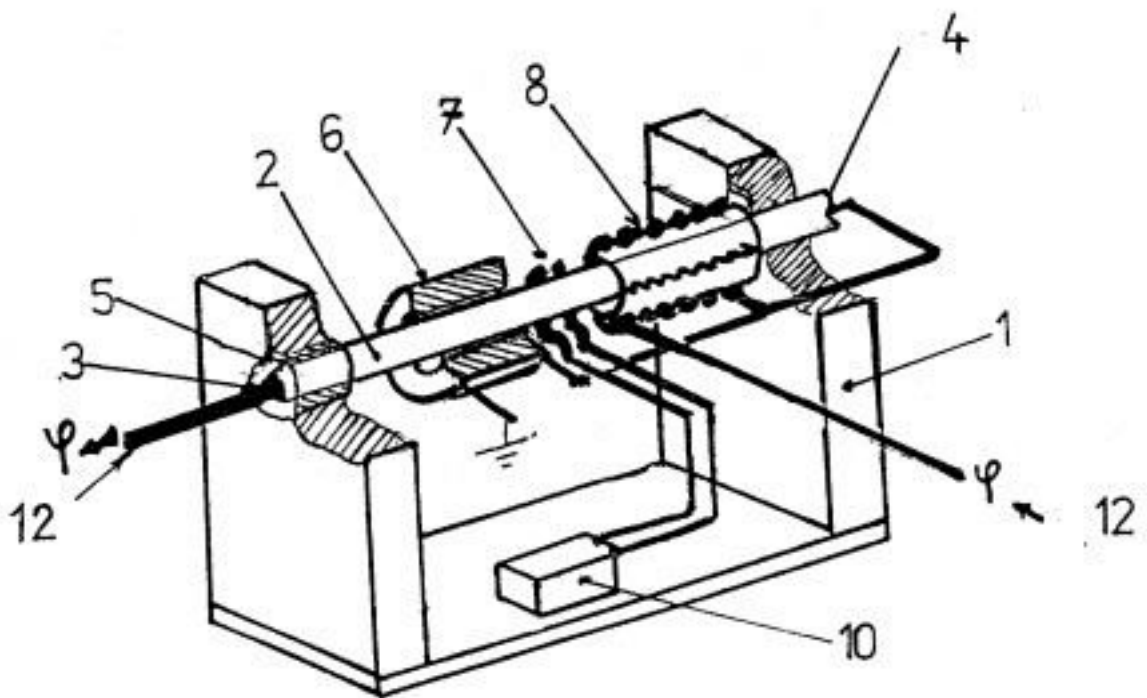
shows in sectional view a simpler embodiment of the generator without regulator and with three coils.
